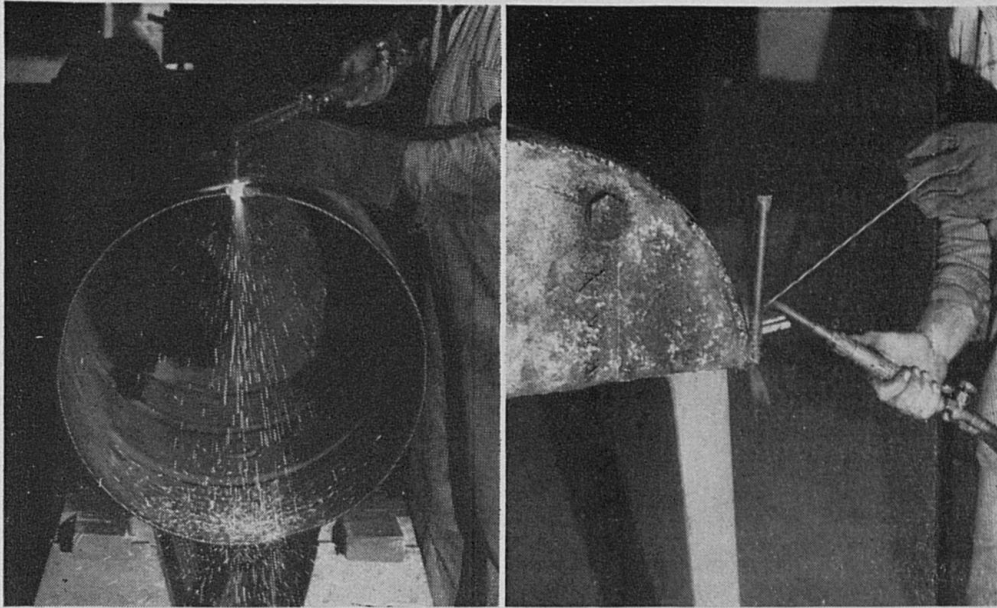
How to make a barbecue pit from a steel drum. (left) First, remove the head of the drum with a chisel; then split the drum with an acetylene torch. (right) Weld half of the head of the drum back into place, and then weld to each corner a piece of half-inch pipe 6 inches long.
